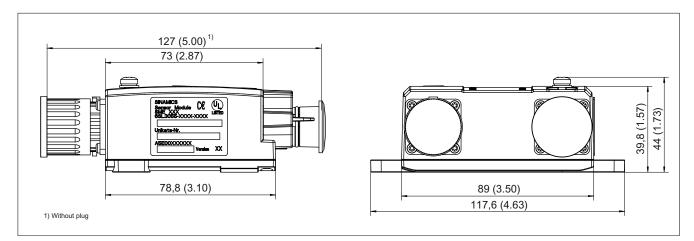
Dimension drawing of Sensor Module External SME120, all data in mm and (inches) order number 6SL3055-0AA00-5JA0
